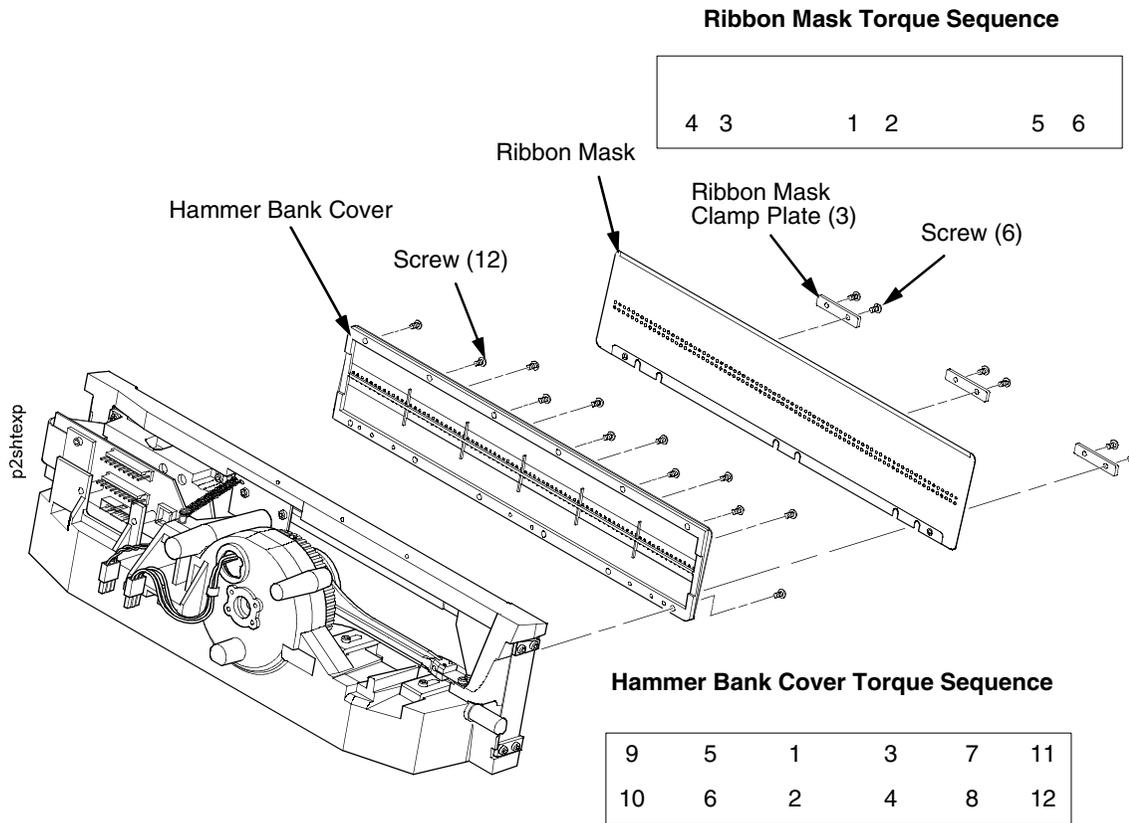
Hammer Bank Cover Assembly / Ribbon Mask
